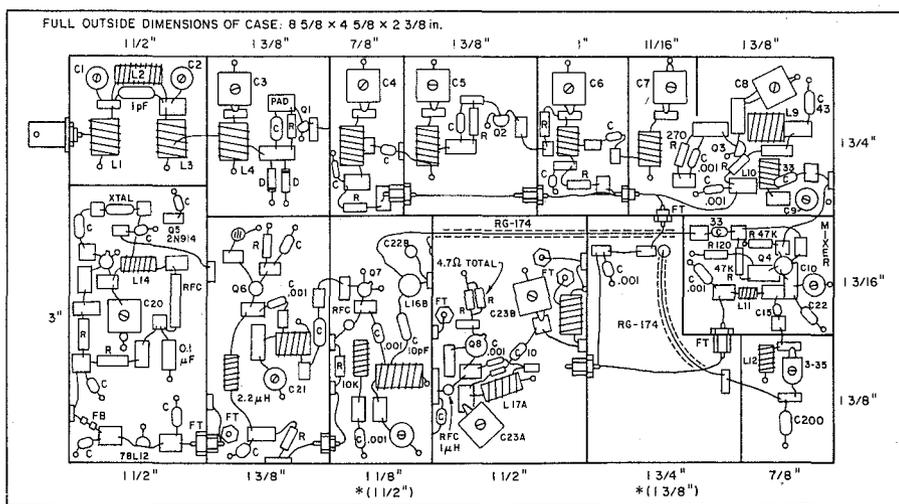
Major parts positioning (approximate dimensions) for the receiver and oscillator, top section.
